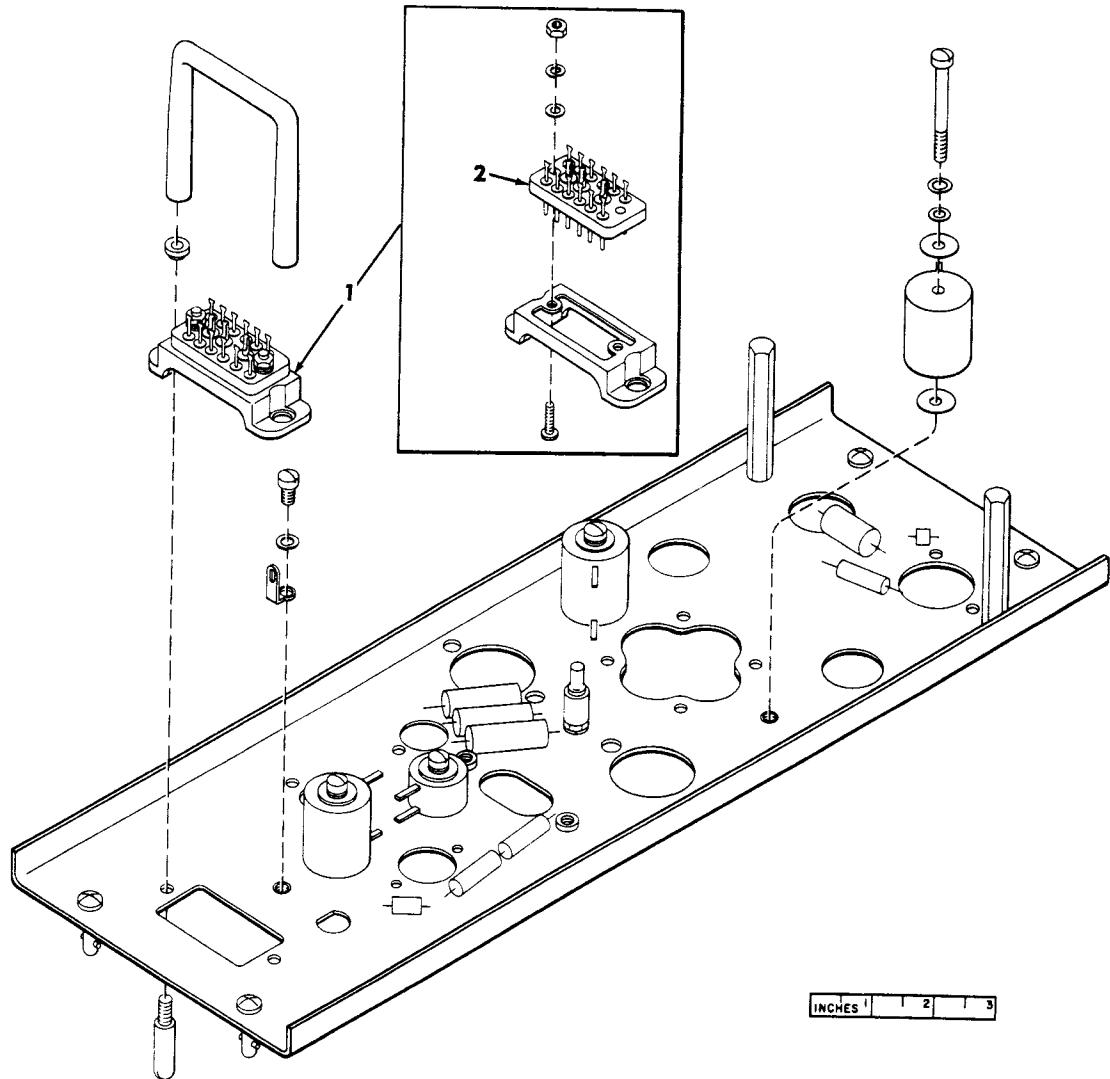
Generator, puls. G-30101 (S097726)—partial exploded view
